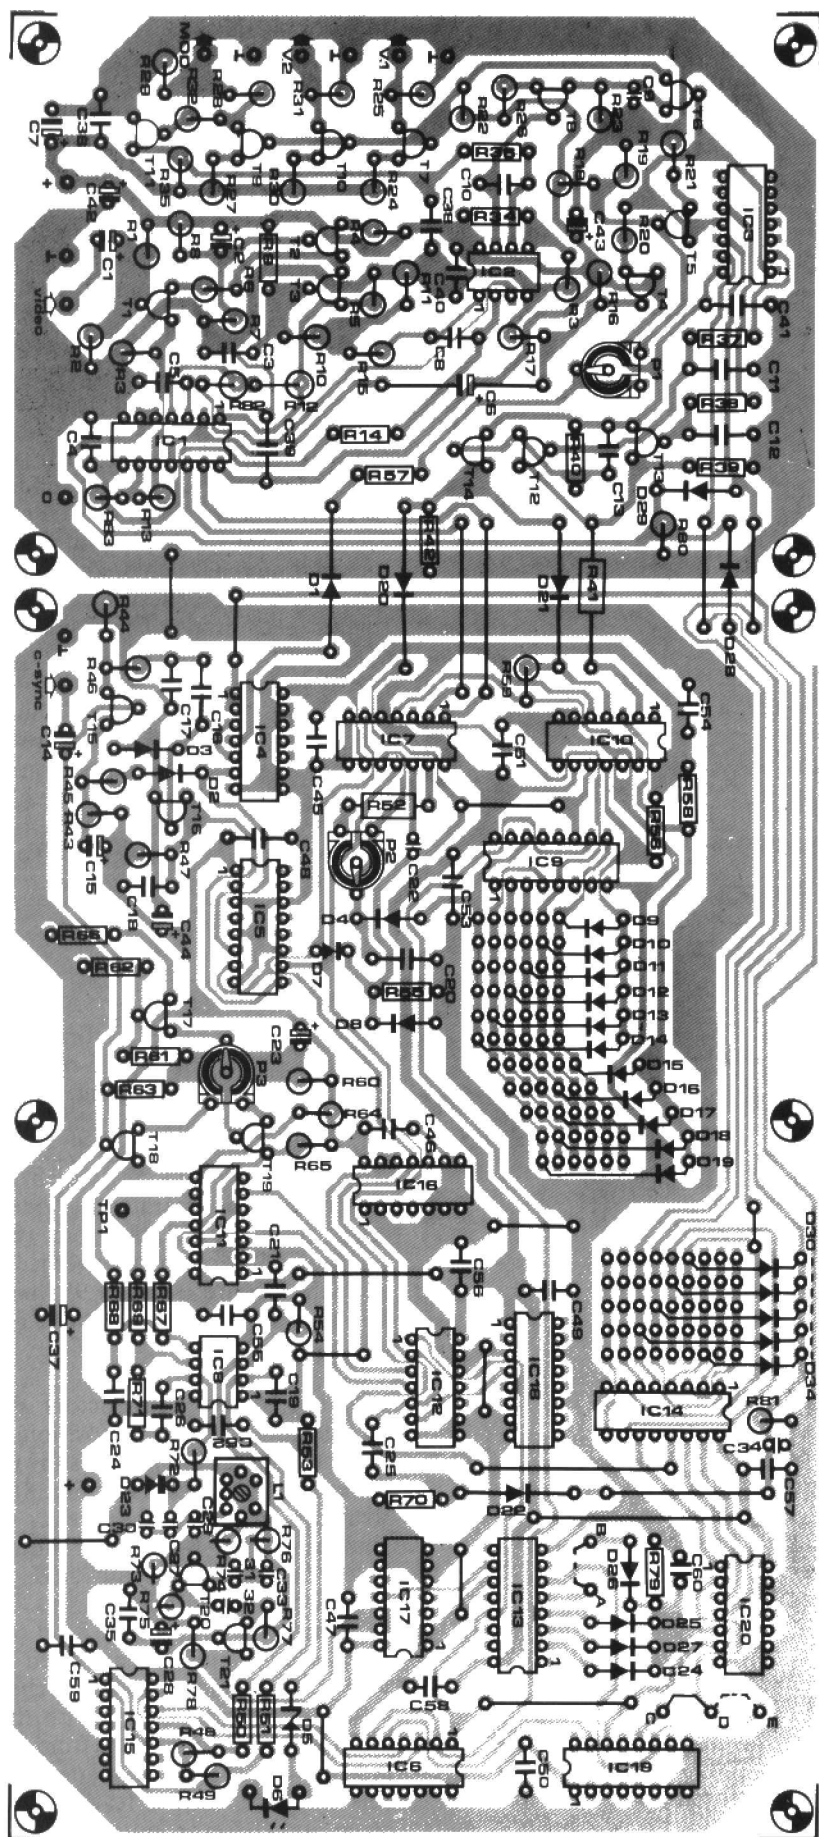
The printed-circuit board for the decoder may be cut into two to separate the digital circuitry plus PLL from the video processor (PCB shown at 90% of actual size).
